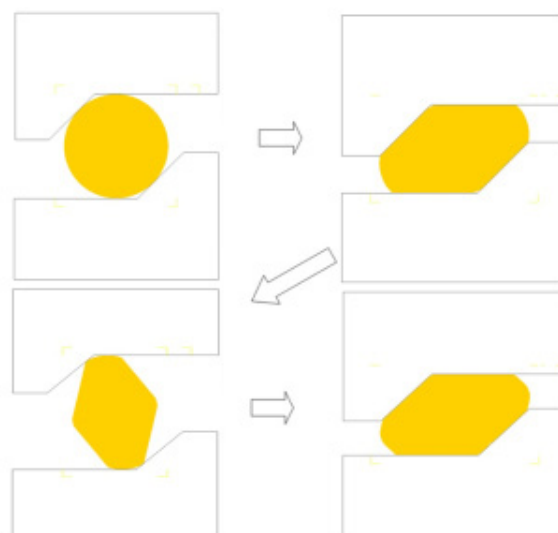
Scheme of forging (broaching) of blanks in strikers of a new design.
